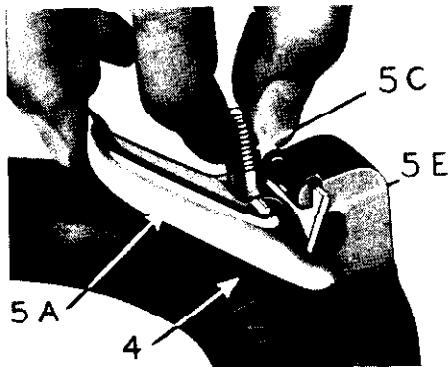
Illustration No. 31—Figure No. 8 Showing Assembly of Clutch Fingers—J-20 Models
